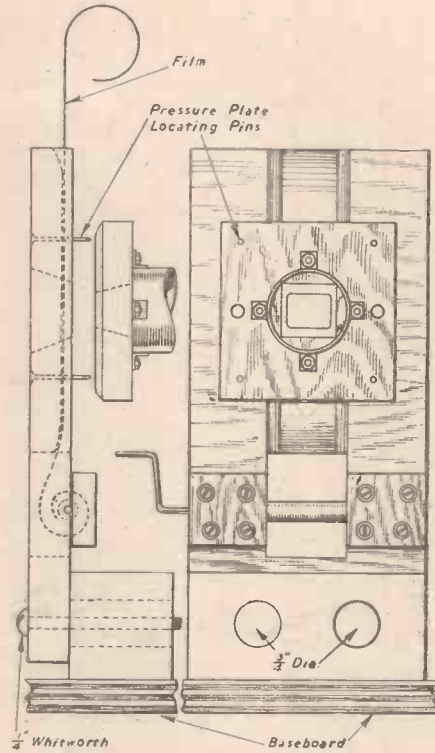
Side and front views of gate, pressure plate, and lens tube mounting.
